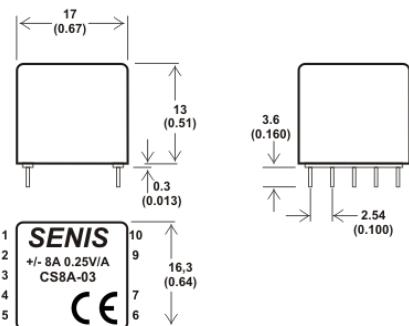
The CS-03 series sensor outline drawing (mechanical dimensions) and pin out description.
